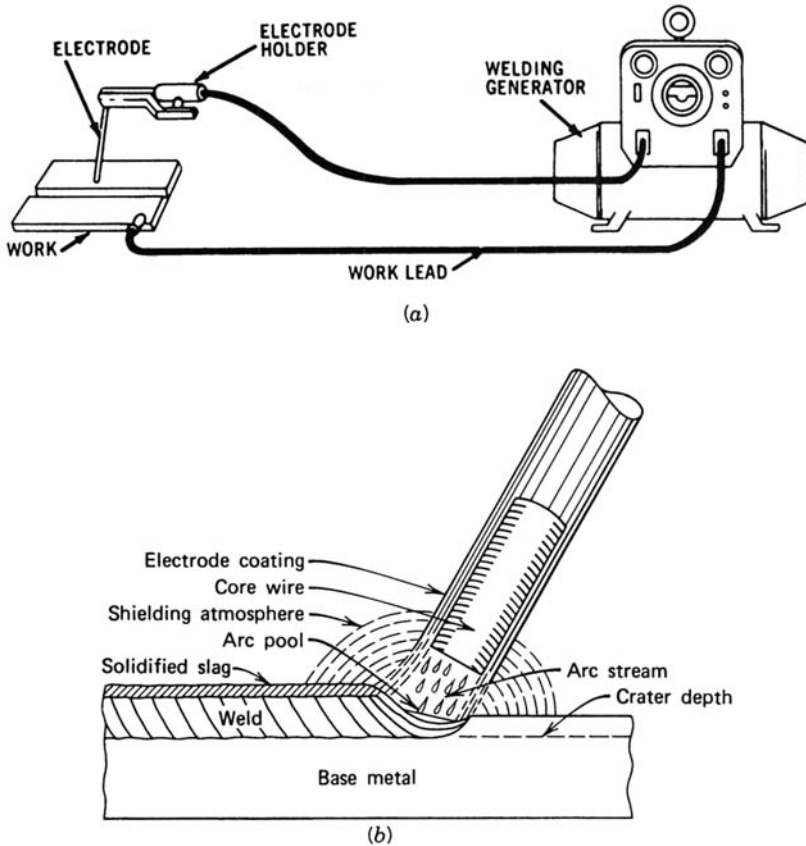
(a) Shielded metal arc welding (SMA) (Courtesy Hobart Brothers, Inc.). (b) Cross section of the arc area.
